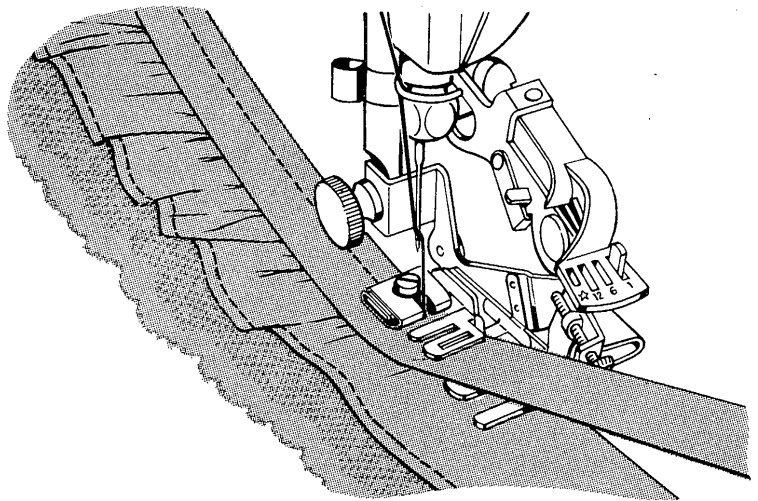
ADDING A FACING AS THE RUFFLE IS BEING MADE.
